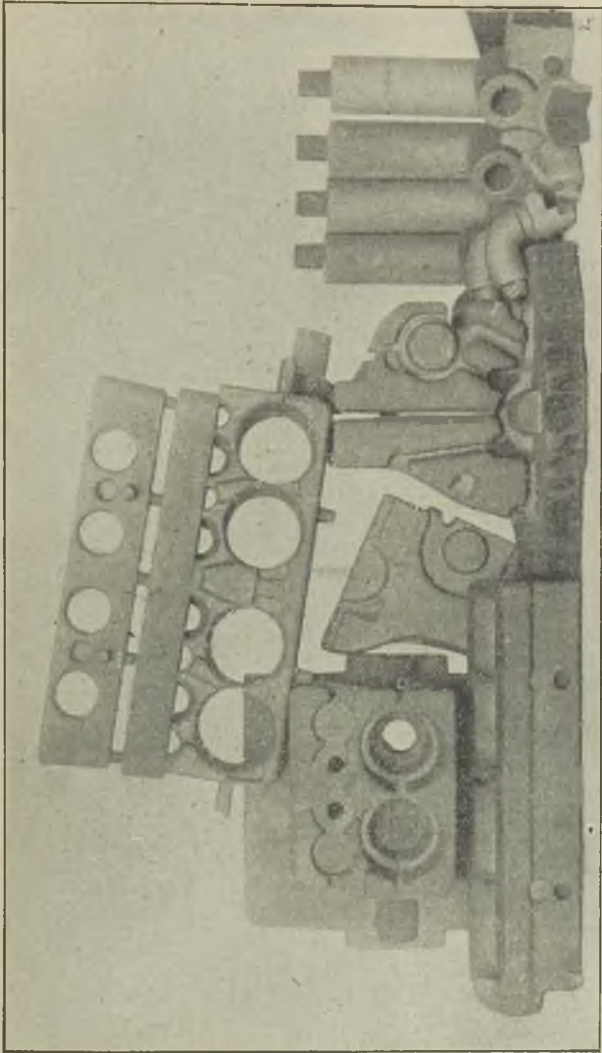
SET OF CORES FOR A FOUR-BORE WATER-COOLED MOTOR CYLINDER.
